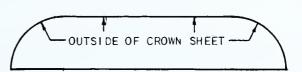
Boiler Lower Wrapper and Crown Sheet
